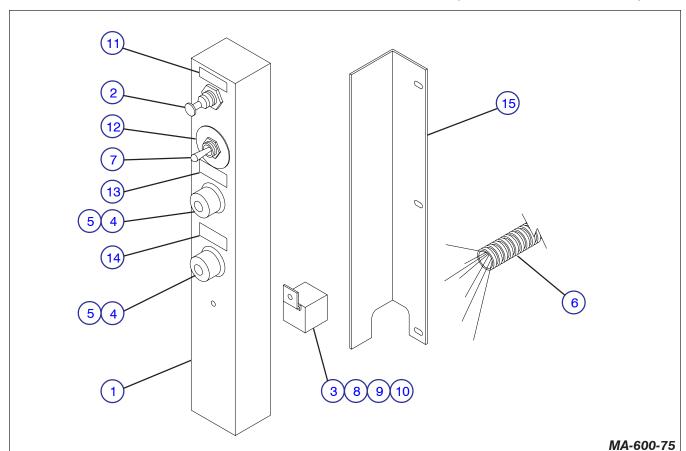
ENGINE ROLL-OUT TRAY ASSEMBLY (Machines With Serial # 30418 and Below)
